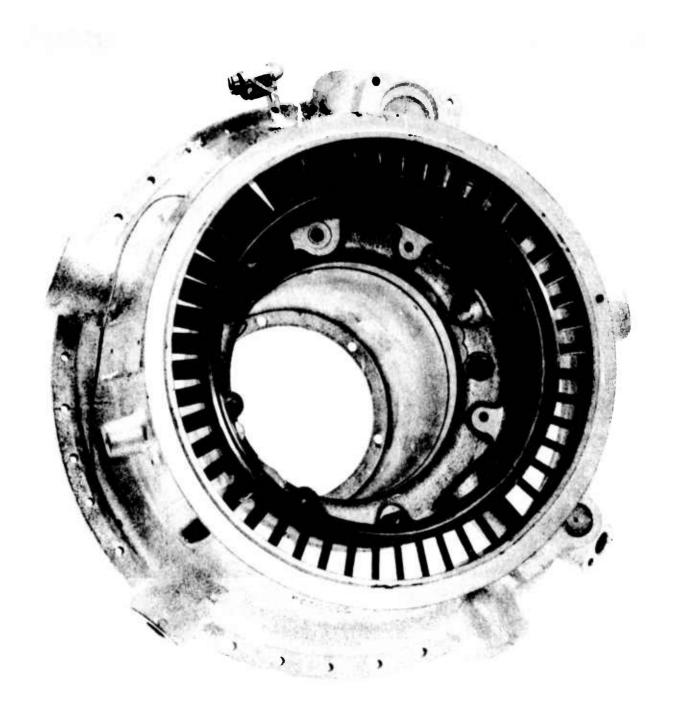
Forward End of Midframe. The Final Design is Shown in Figure 54.
